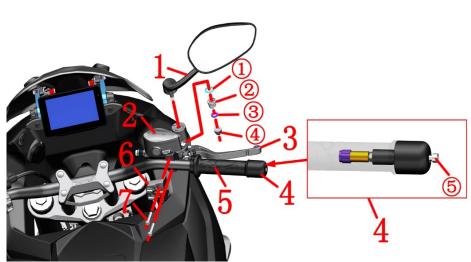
FR	ONT FORK	Right handlebar component (old model)	CHK	40)
